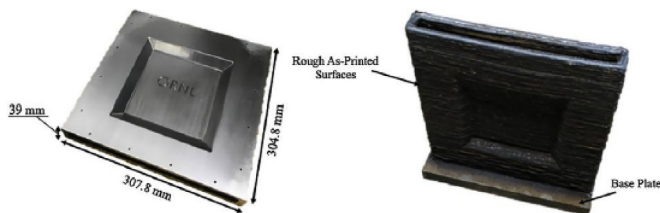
Case 15 Compression moulding mould (female side) [333]
